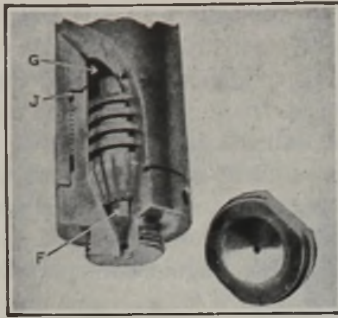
Section of lower part of spray valve on Busch-Sutzer Bros Diesel engine and disassembled parts of valve.
